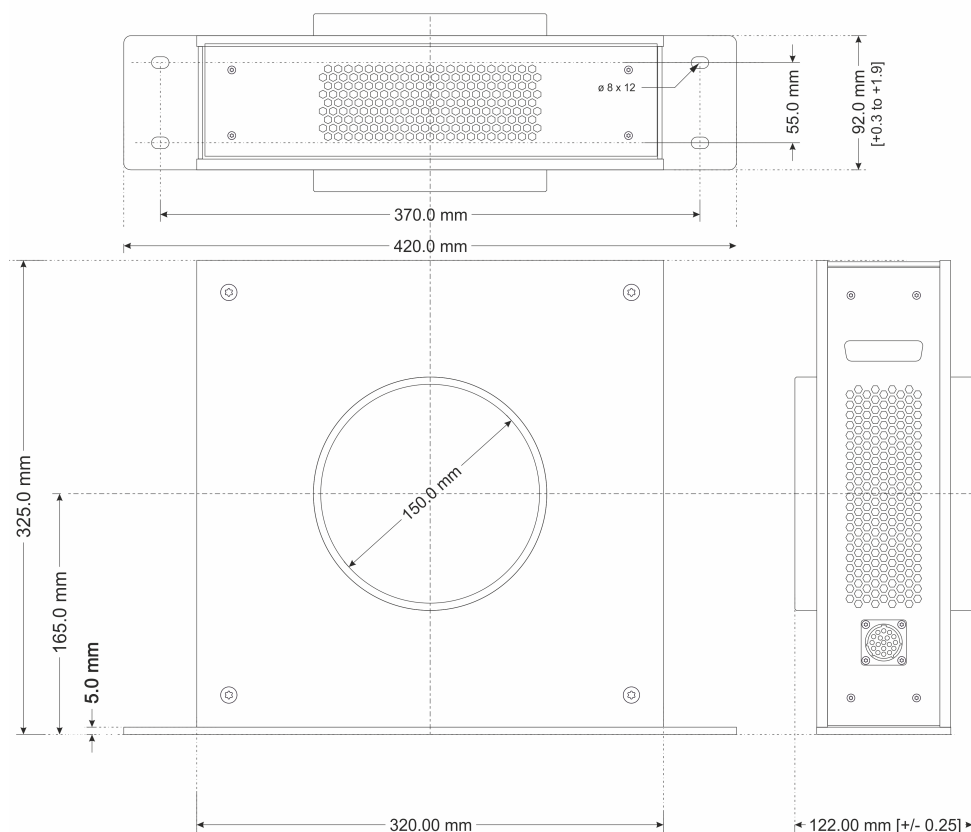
Dimensions of transducer head. 0.3 mm Tolerance
